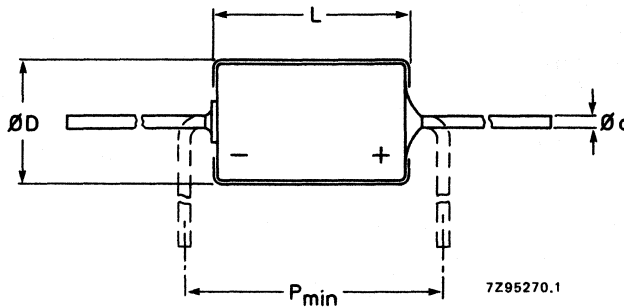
Component outline. For dimensions ϕd , ϕD , L and P , see Table 3.
